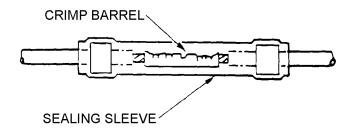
Sealing Sleeve Centered Over Crimp Barrel
